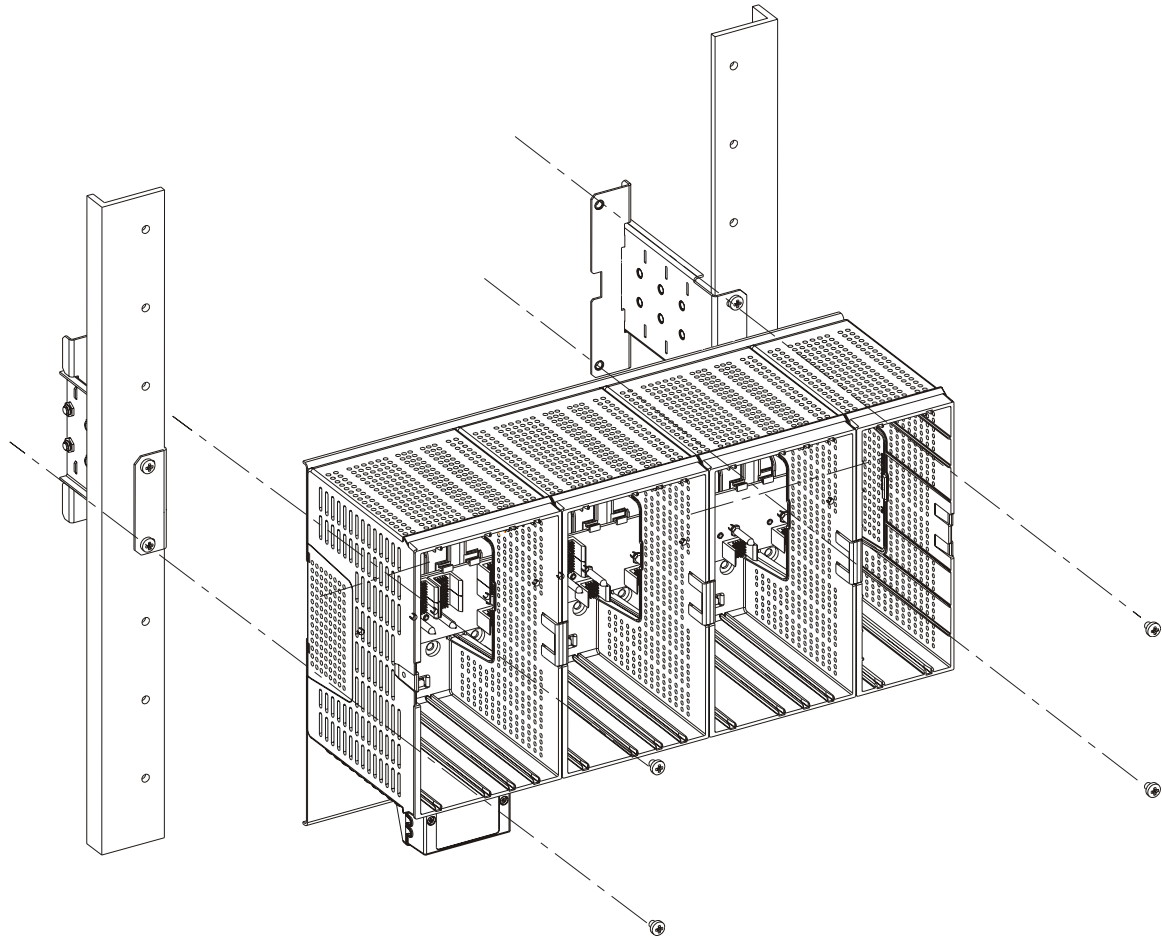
Installation of ACE3600 RTU 19" Rack- Exploded View
